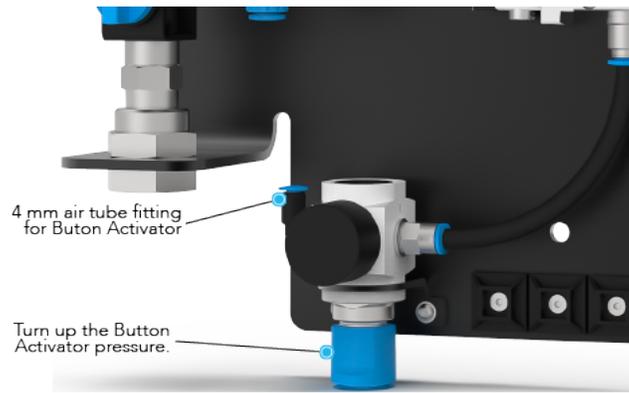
Air tube fitting for Button Activator on pneumatic panel
